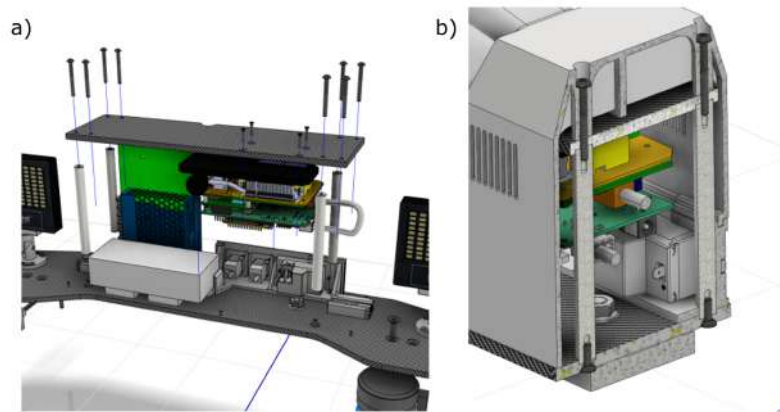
a) The assembly of the projector board and the projector and b) the mechanical connection between the invar rods and the 3D printed case.
